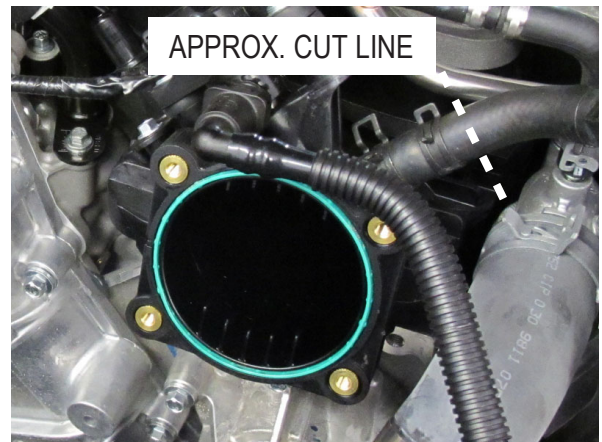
B-1: Cut Vacuum Hose (some components removed for clarity)
